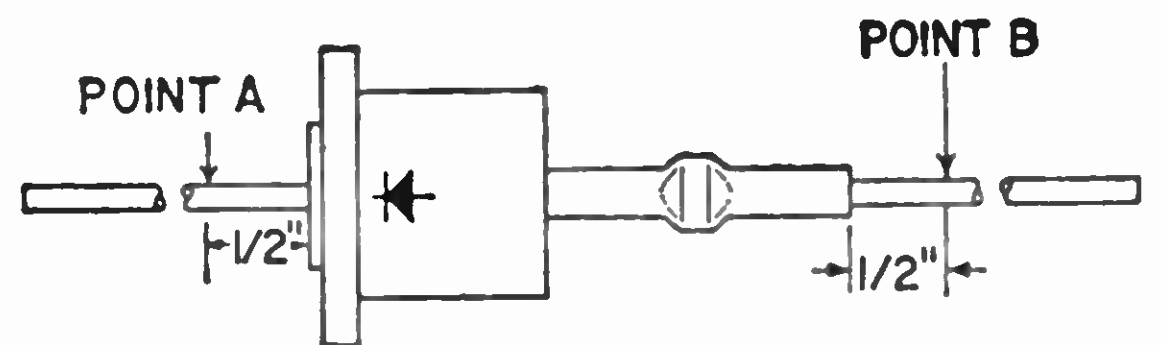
Diagram showing areas beyond which dip-soldering should not extend.
